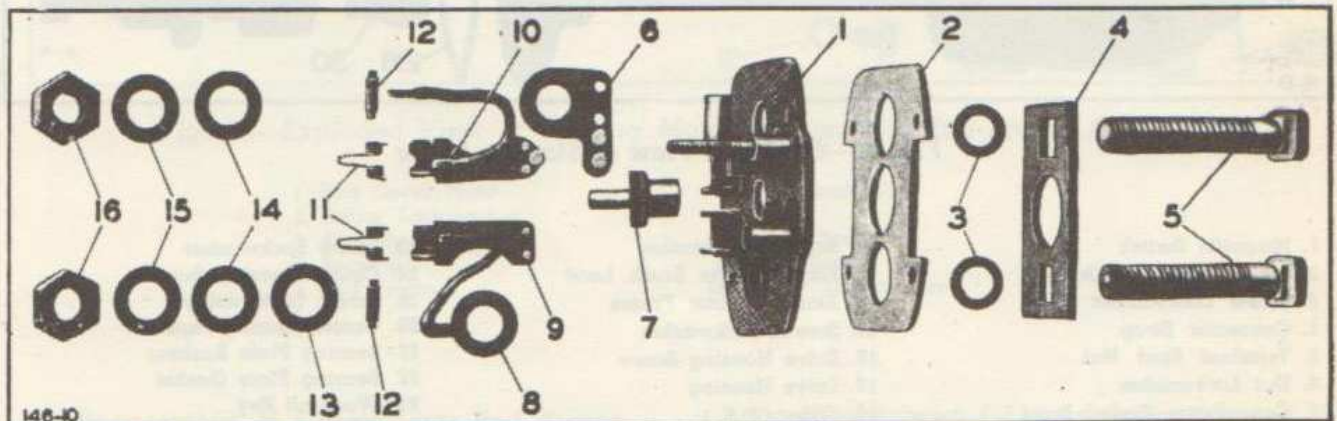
Exploded View of Parallel Switch Terminal Stud and Plate Assembly
